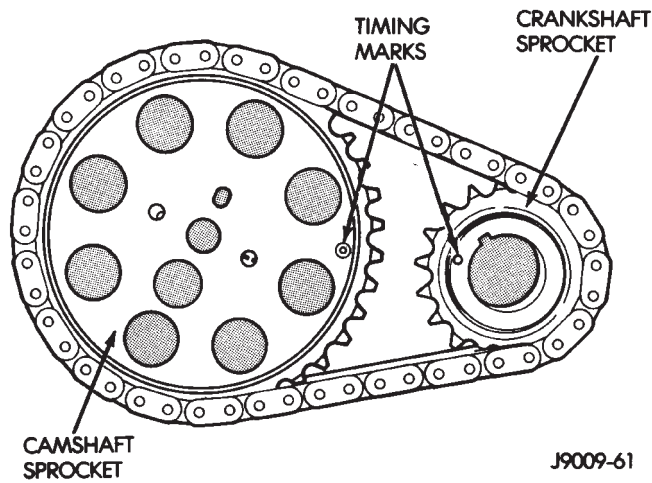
Crankshaft/Camshaft Alignment—Typical
